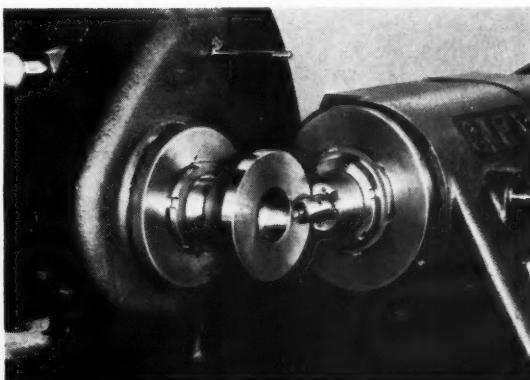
A. This photograph illustrates the use of set-up gauges for precisely locating testing machine workheads. These gauges are specially made for each job.
